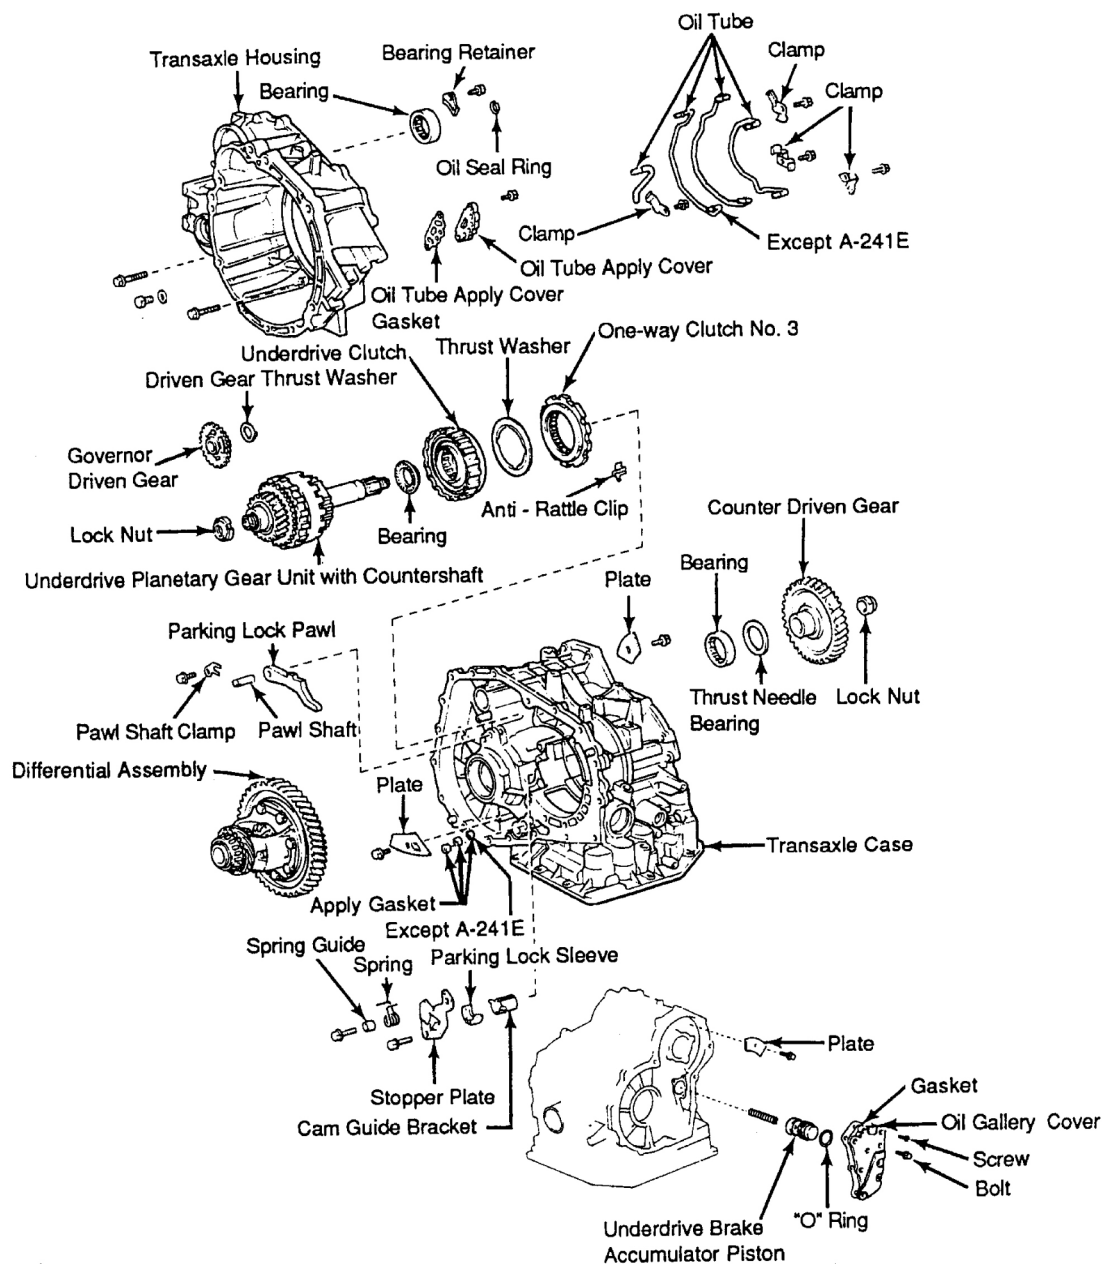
Exploded View Of Front Components (A241E, A-241L & A-243L)
